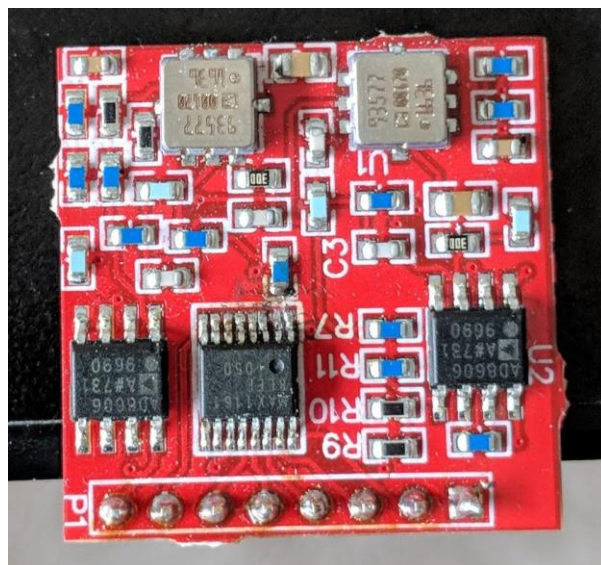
Physical accelerometer breakout board with perpendicular mounted accelerometers
